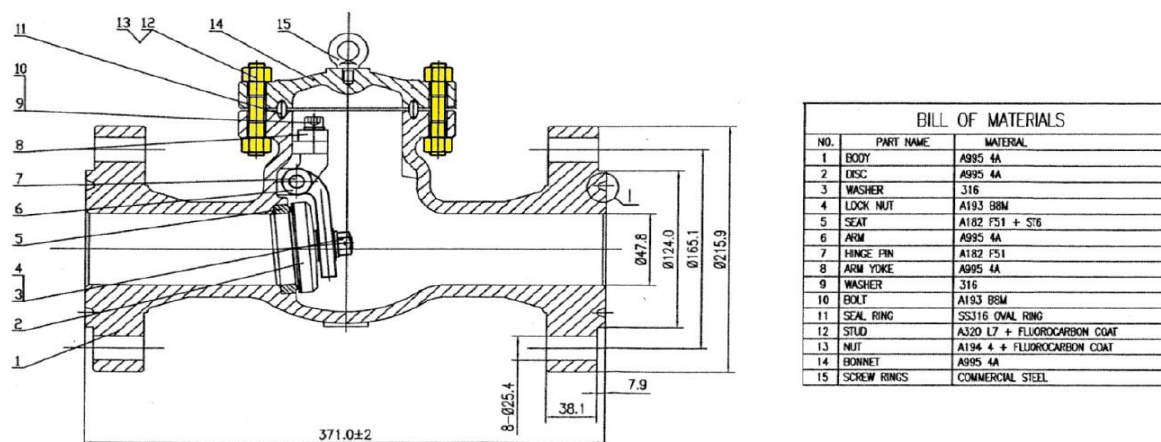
Assembly drawing of choke valve. The stud bolt was marked in yellow color
